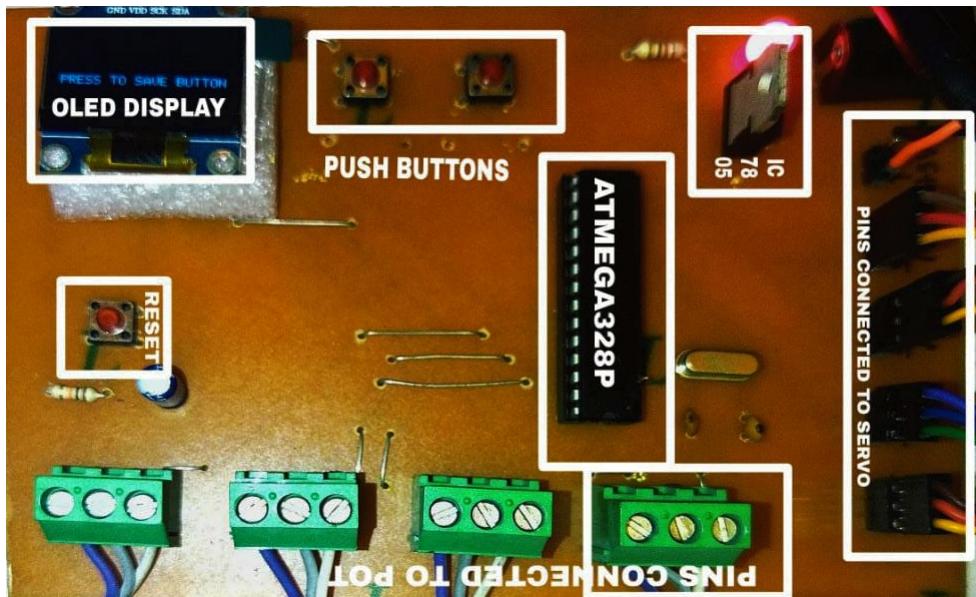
COMPONENTS MOUNTED ON PCB BOARD
